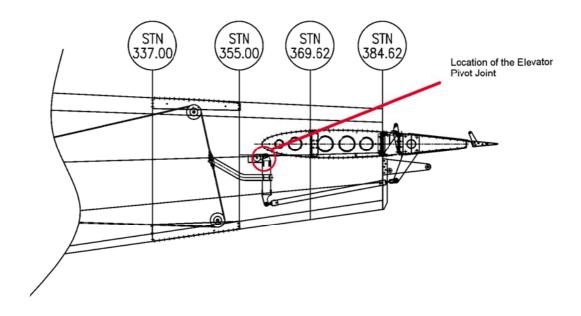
LOCATION OF ELEVATOR PIVOT JOINT
